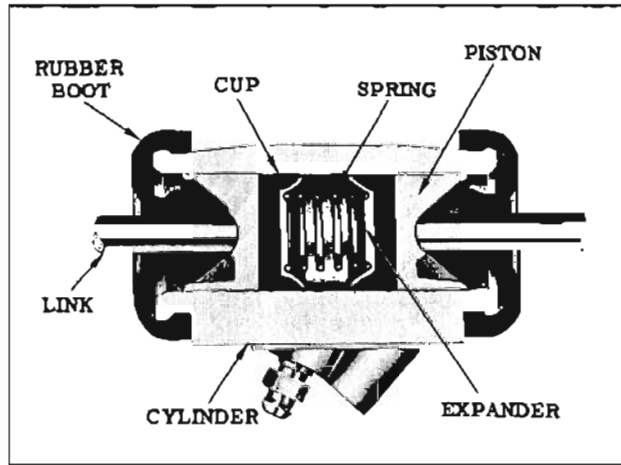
Wheel Cylinder (34, 35, 36, 38 & 39 Series)
